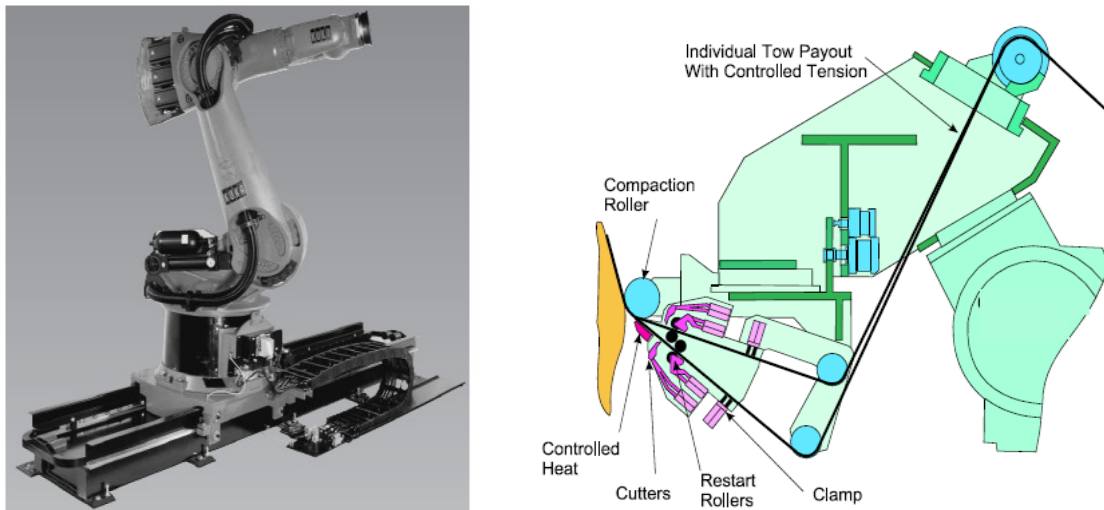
6-axis robotic platform made by KUKA robots and the fiber placement head [4]
